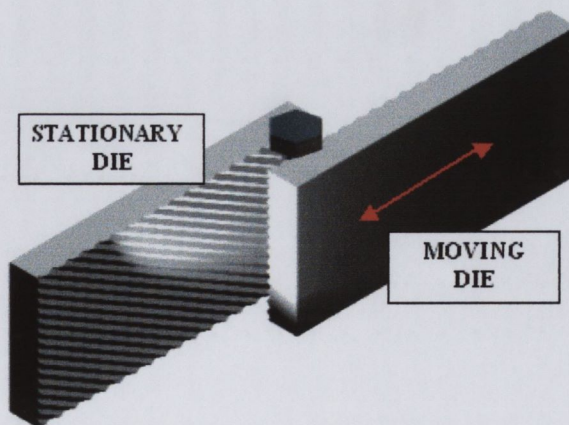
Operating Principle of Flat Thread Rolling Dies
